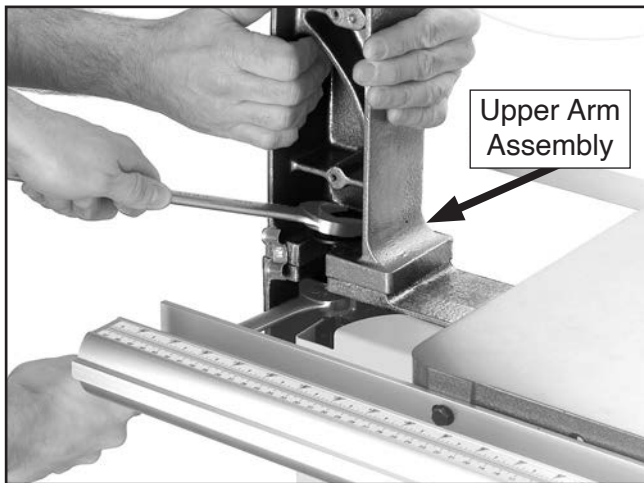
Loosening hex bolt while assistant supports upper arm assembly.
